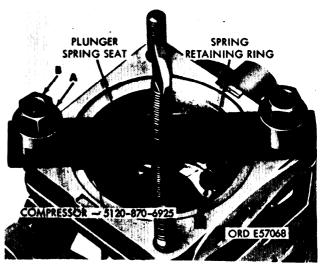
Removing spring retaining ring using spring compressor—5120-870-6925.
